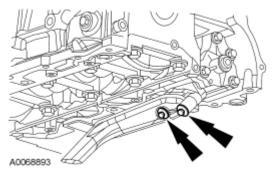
Locating Oil Pump Pickup Tube Bolts Courtesy of FORD MOTOR CO.
